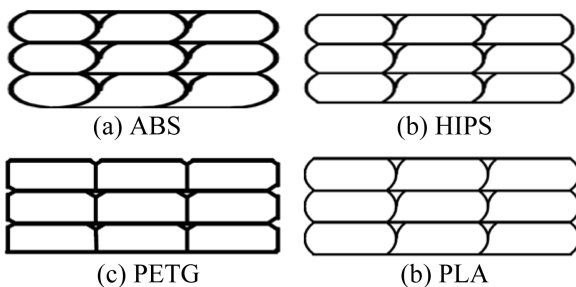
Schematic drawings of layered roads in the fractured surfaces manufactured by ME type 3D printing.
